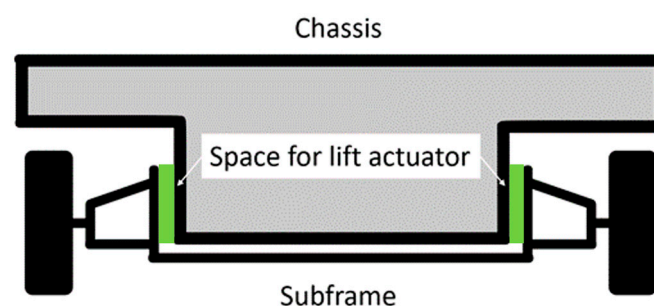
Cross-section view at the front axle of the Driveboard, green: space for lift actuator.
